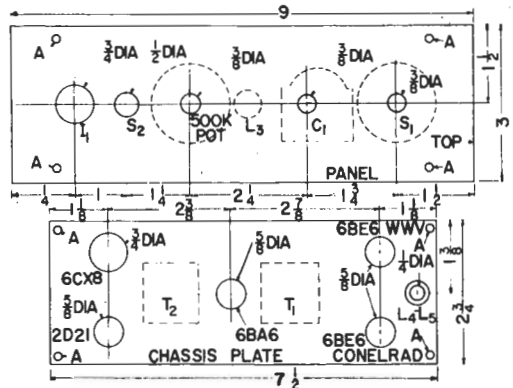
PANEL AND CHASSIS parts layout for the Conelrad monitor. The IF transformers on this model are $1\frac{1}{8}$ inches square. The 6BE6 mixer tube for the Conelrad receiver can be centered on the chassis plate if the 6BE6 WWV converter tube and L_4 — L_5 will not be included in the unit.
